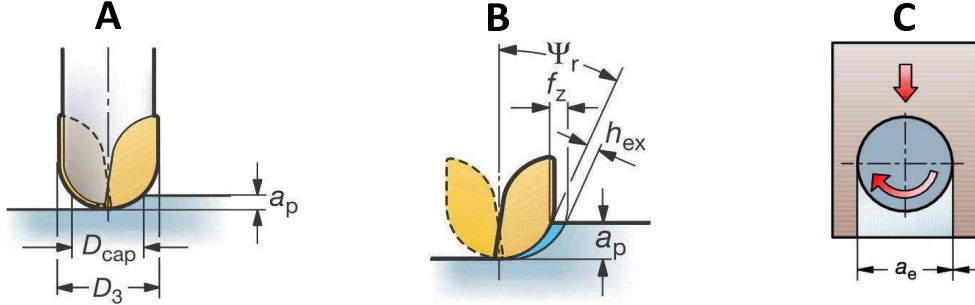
Ball nose end mill cutter (Sandvik, 2011)
